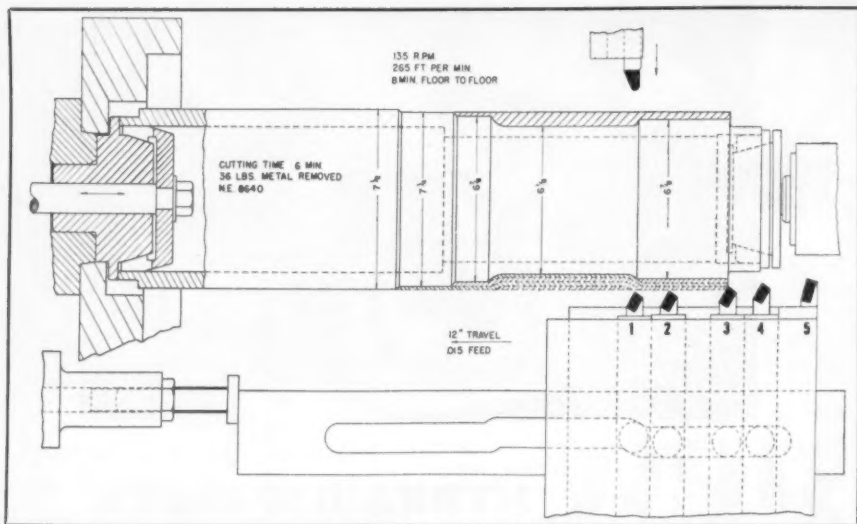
This cross-sectional view of the cylinder shows total metal removed by successive cuts from tools 1, 2, 3 and 4.
